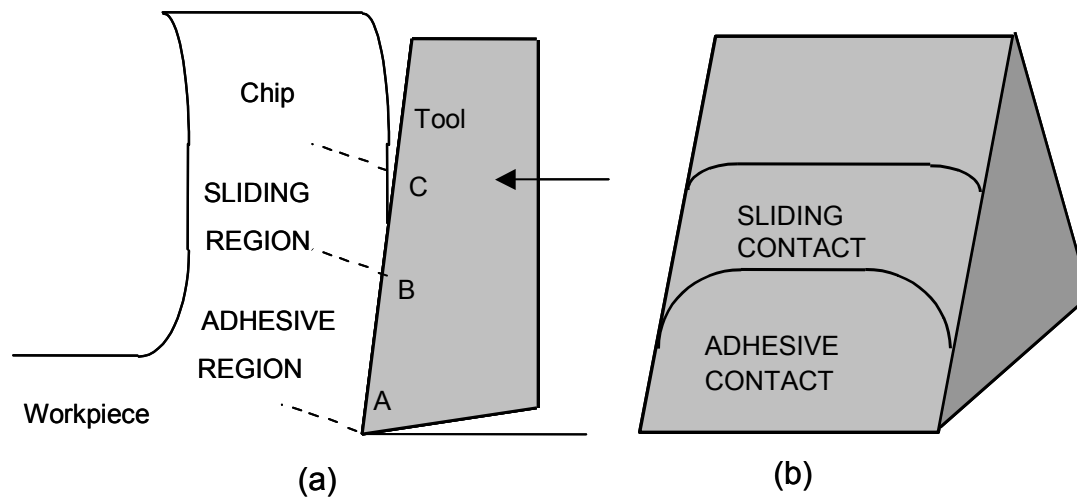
Zones of Contact along the Tool-Workpiece Interface
